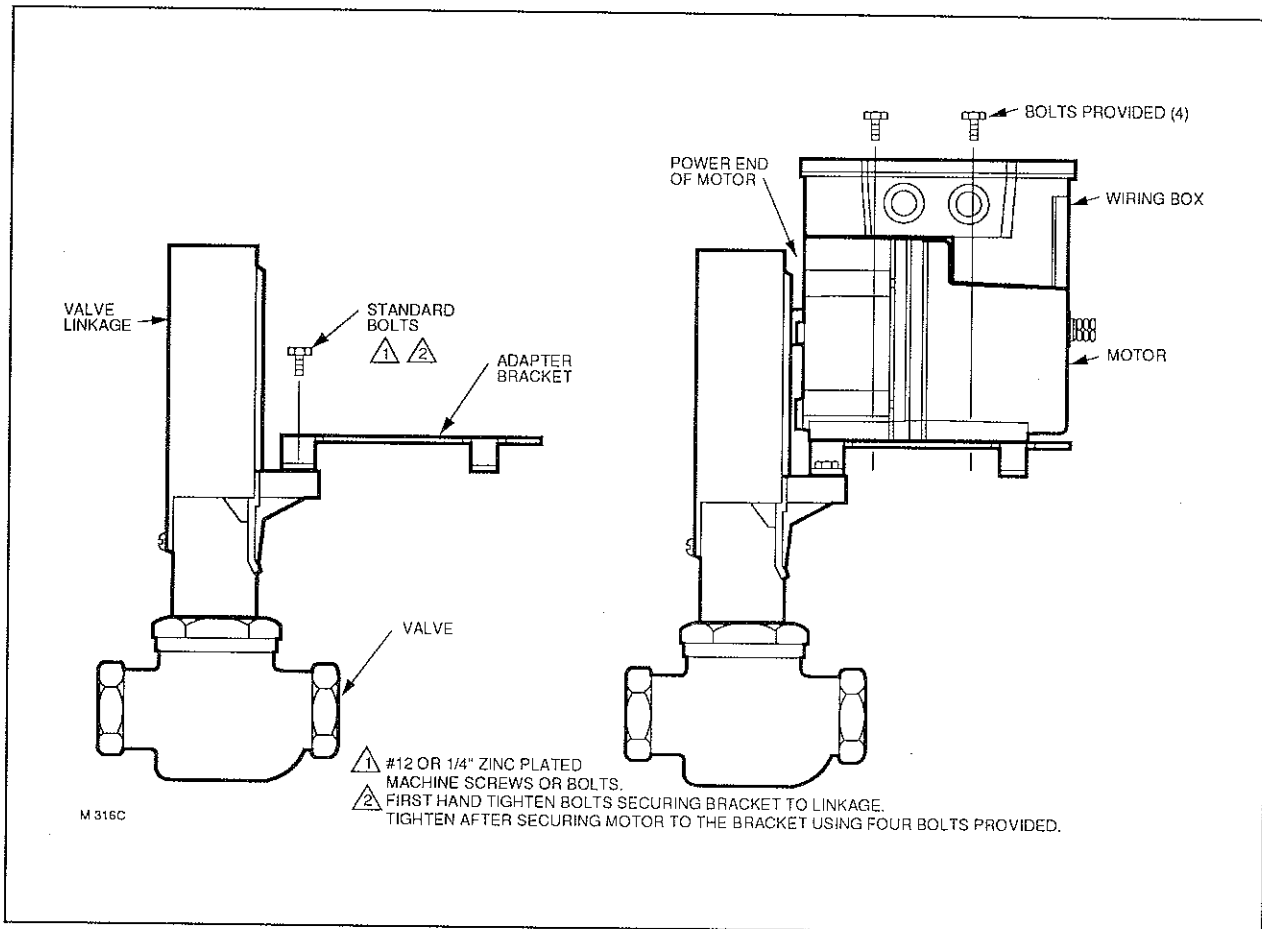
MOUNTING ON VALVE LINKAGE WITH ADAPTER BRACKET.
